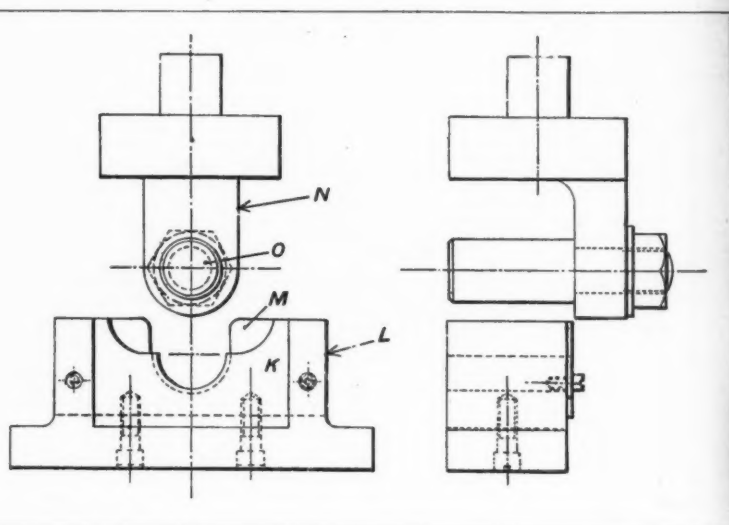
Die for Second Bending Operation which Forms Sleeves Shown at *A* and *B*, Fig. 1, to Cylindrical Shape
